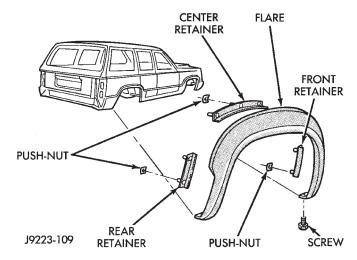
Rear Wheel Opening Flare—XJ Vehicles
